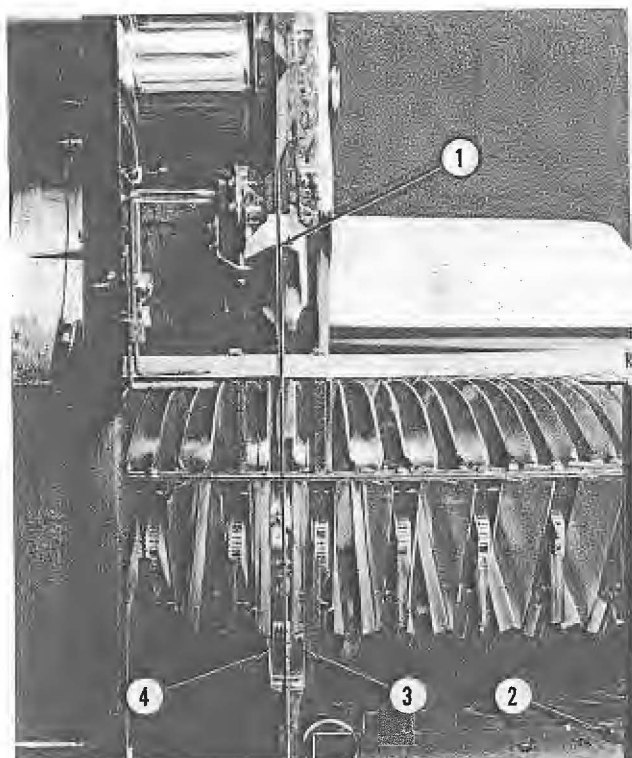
CENTER LINE FOR BACK STOP PAWL SETTING
